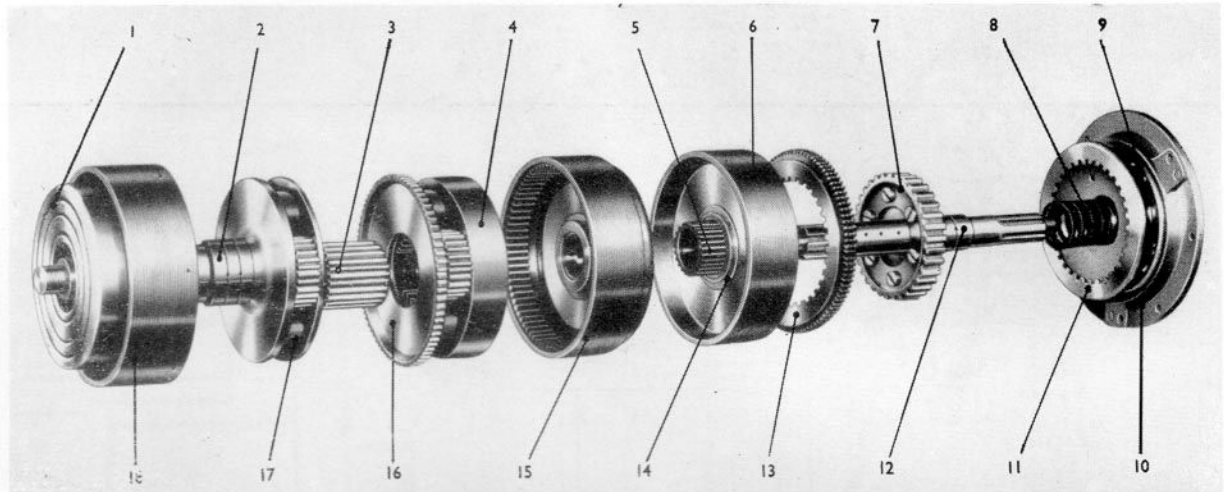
Exploded View of Running Gear (Viewed from Output End)
